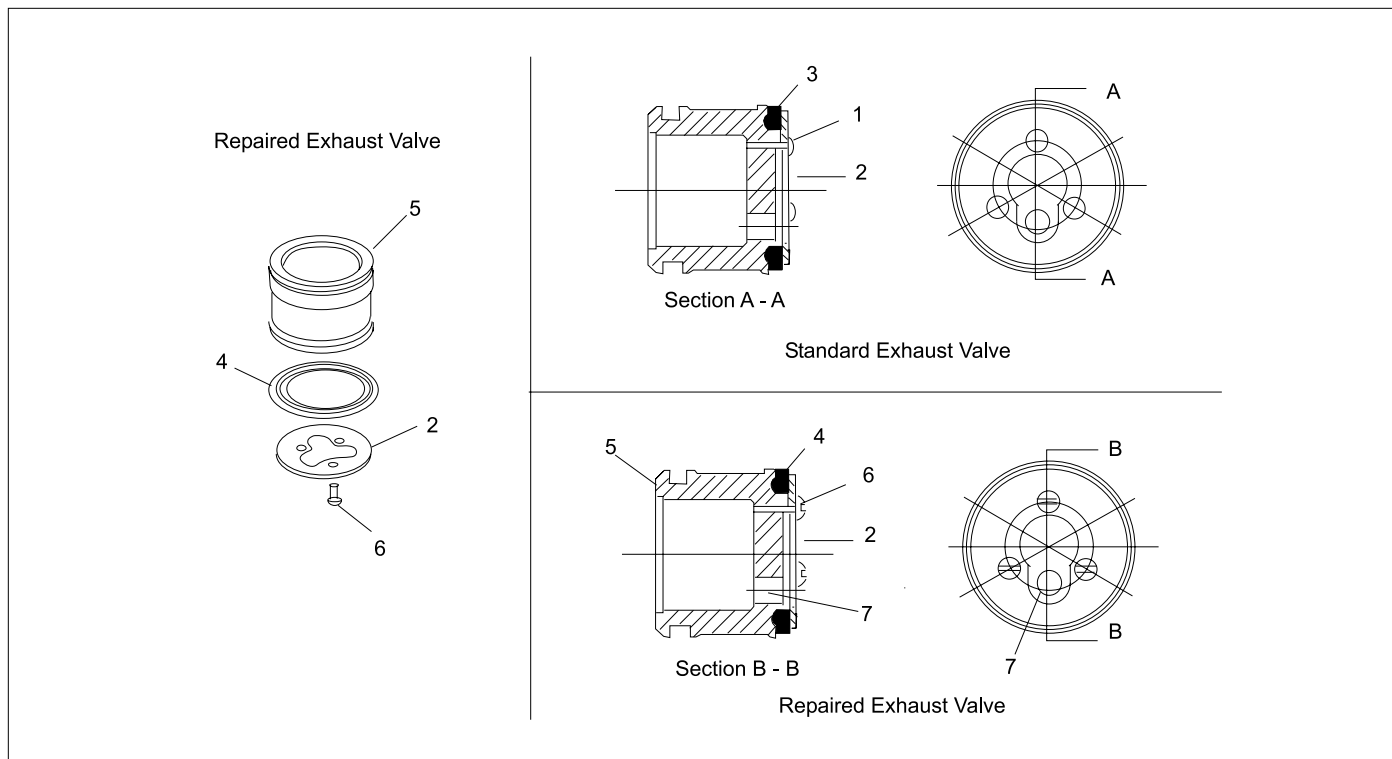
Exhaust Valve Seal Replacement (Drawing G-100)
